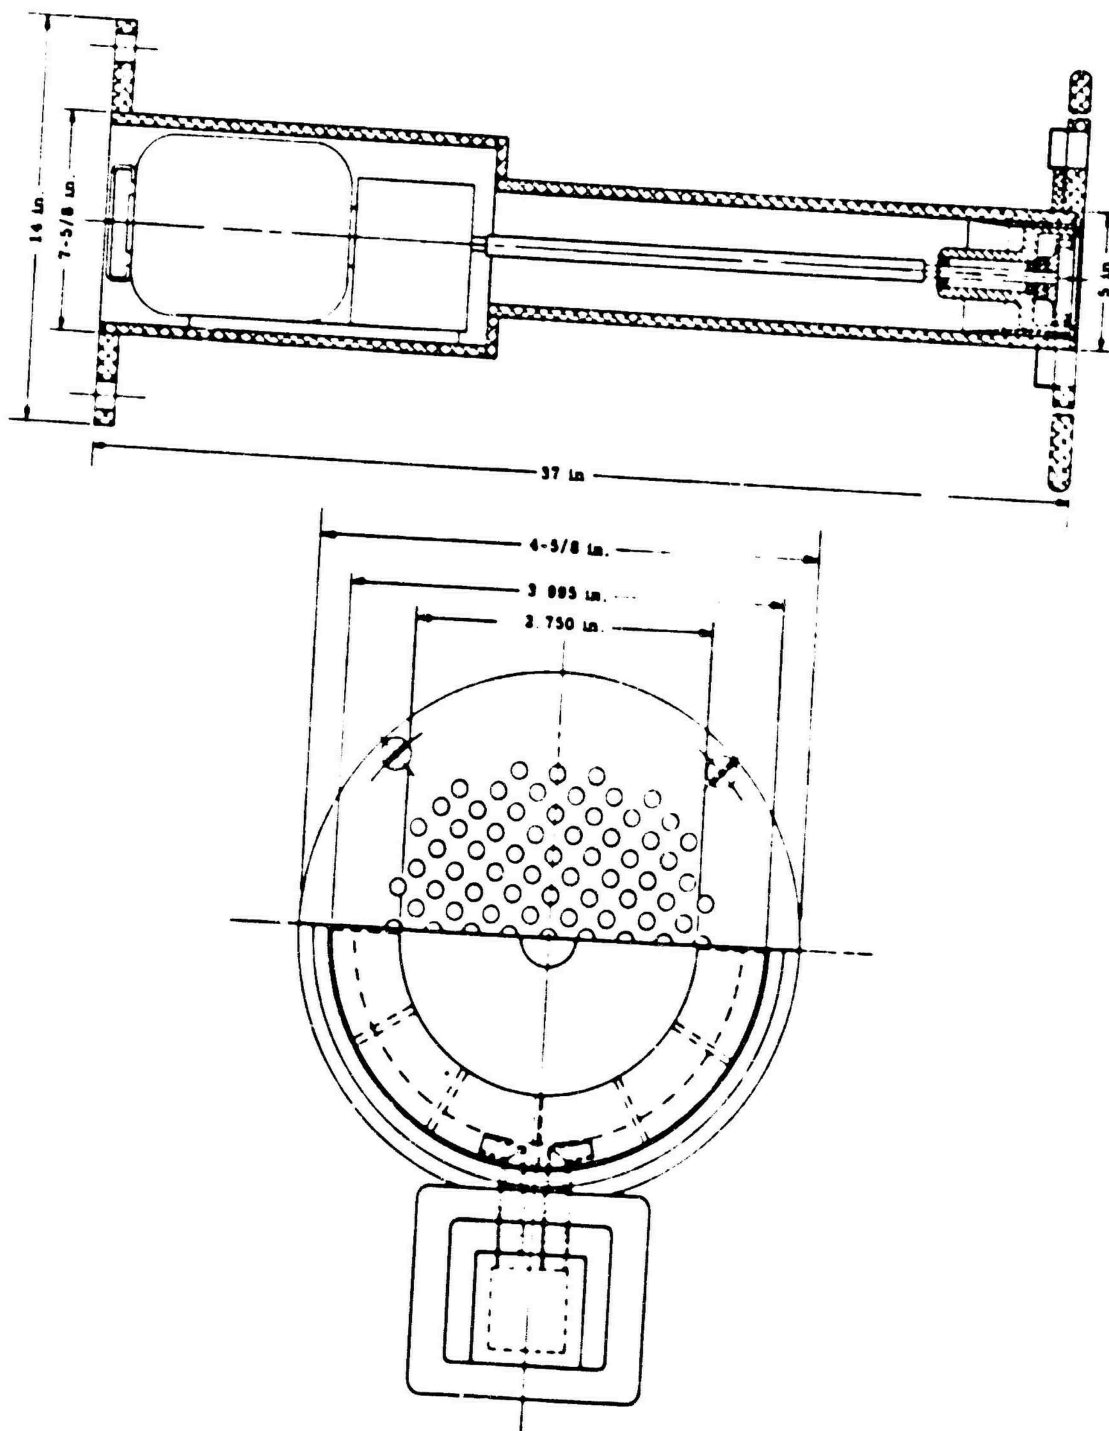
Detail Drawing, Centripetal Density Gage
